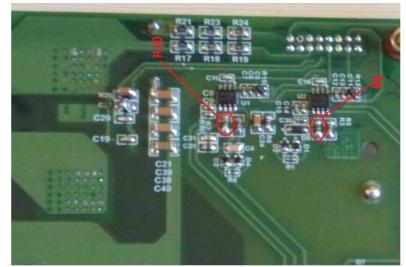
Auxiliary power supply board location on Wolfspeed's CRD-02AD065N reference design board
